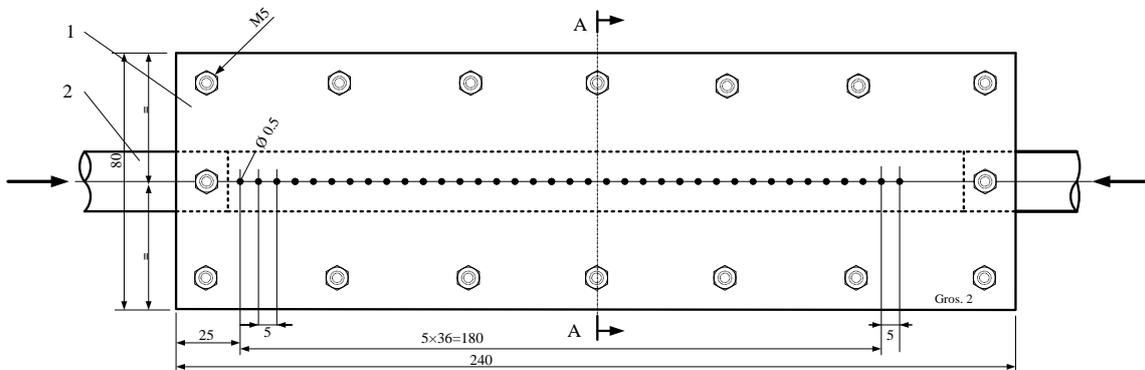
Sketch of the rectangular shaped fine bubble generator perforated plate
